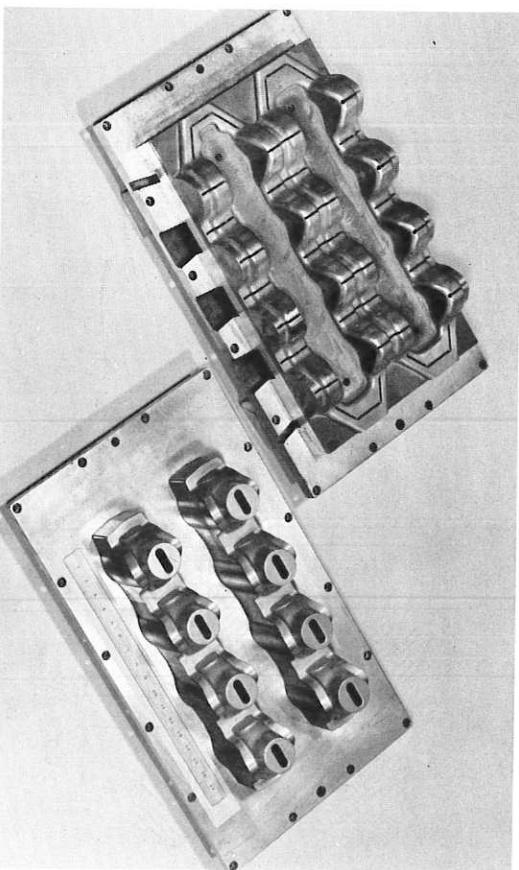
ECM tools that produced the steel forging die shown in Figure 7.55
